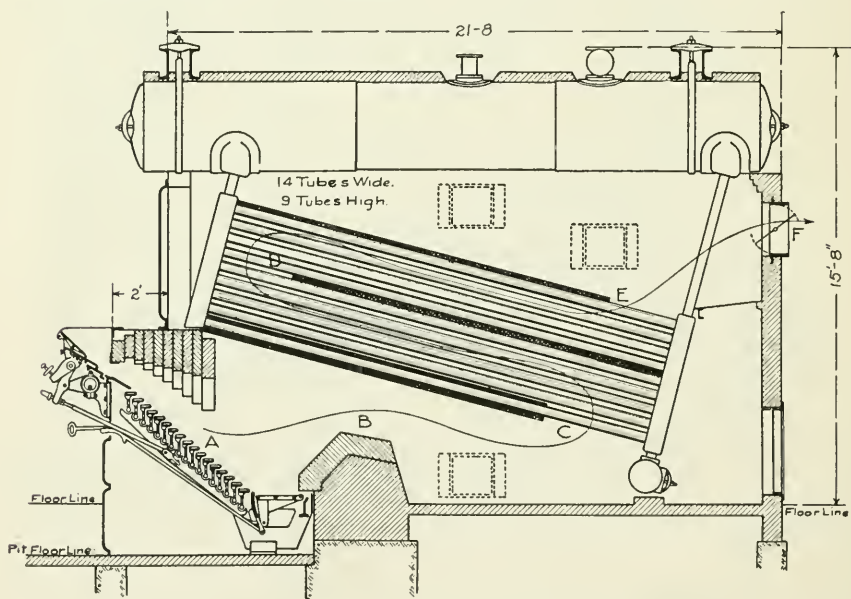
BABCOCK & WILCOX 220 H. P. BOILER EQUIPPED WITH RONEY STOKER
